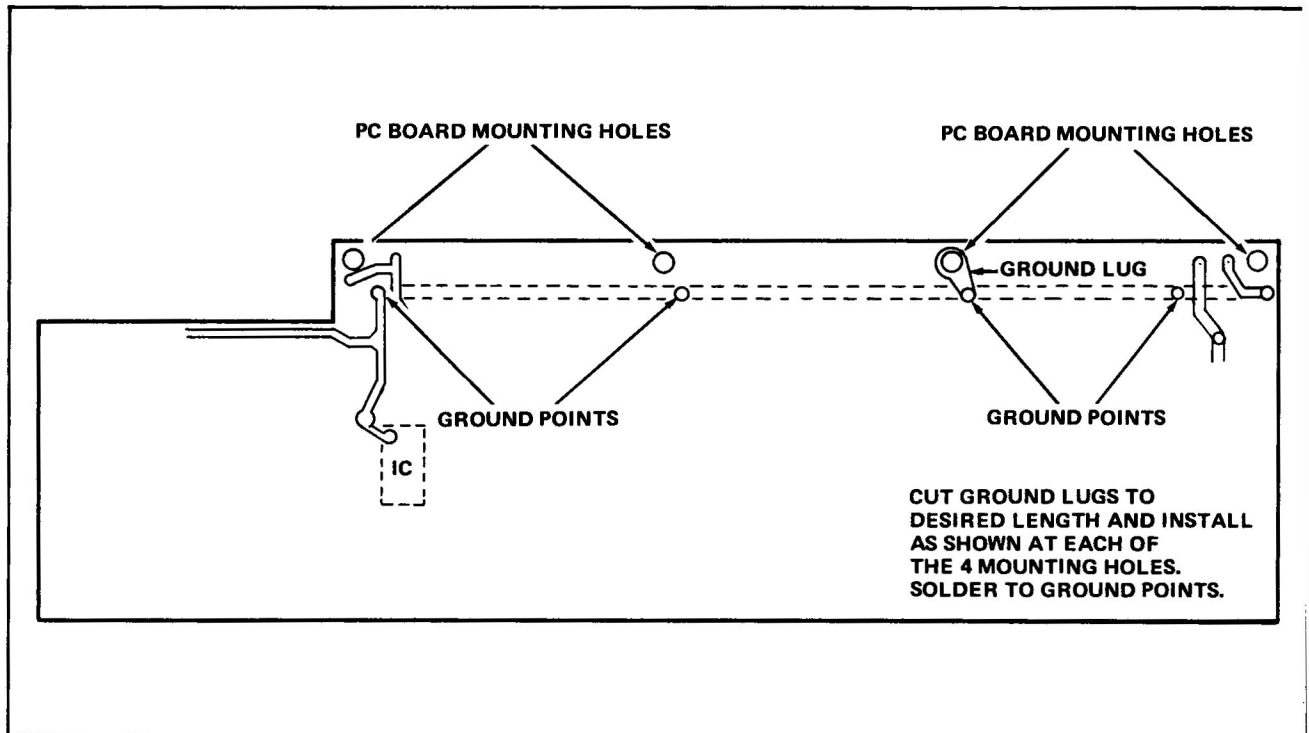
RIGHT HAND CONTROL BOARD - BOTTOM VIEW (POLYMOOG)
